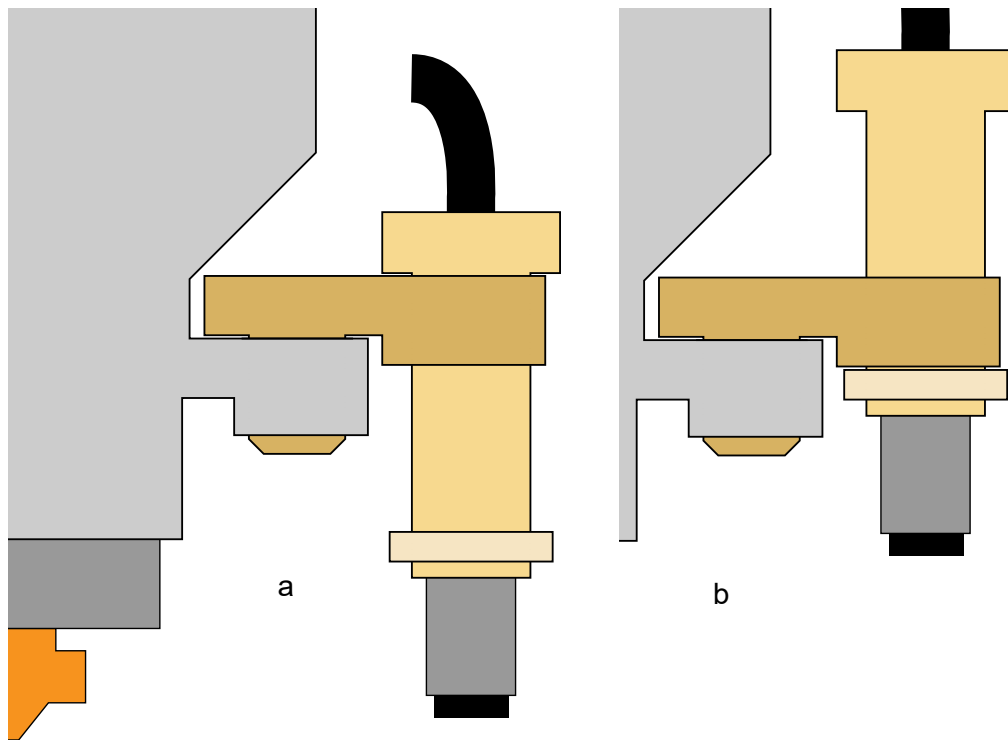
The lowered (a) and raised (b) positions of the height adjustment mechanism.
